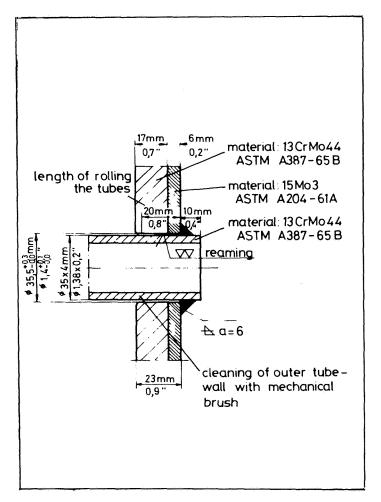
Tube welding in the second tube sheet on gas outlet side of the methanol plant wasteheat boiler (first design).
